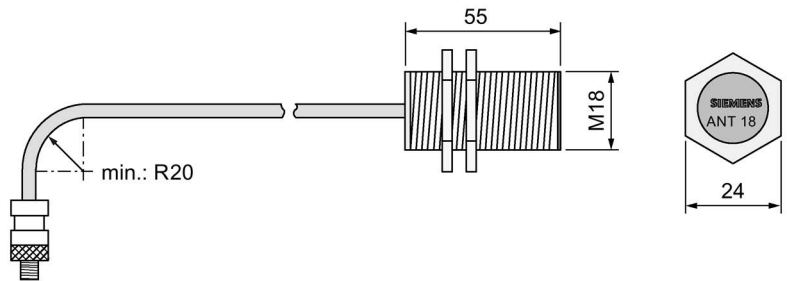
Dimension drawing ANT 18 (all values in mm)
